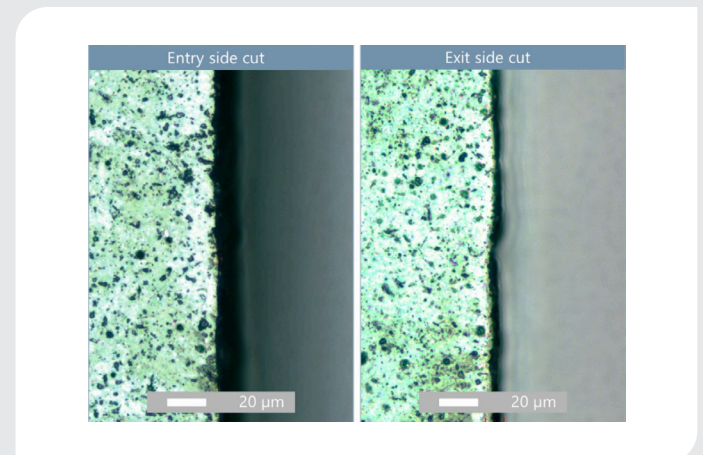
Entry and exit surfaces of 900 μm thick FR4 PCB after laser cutting (20 mm/s net cutting speed).
